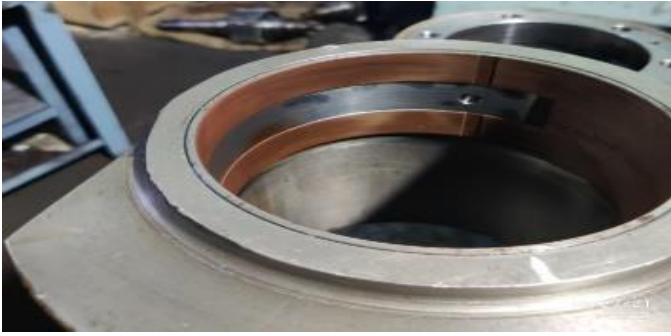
Hydrodynamic bearing in Wire rod block mill
